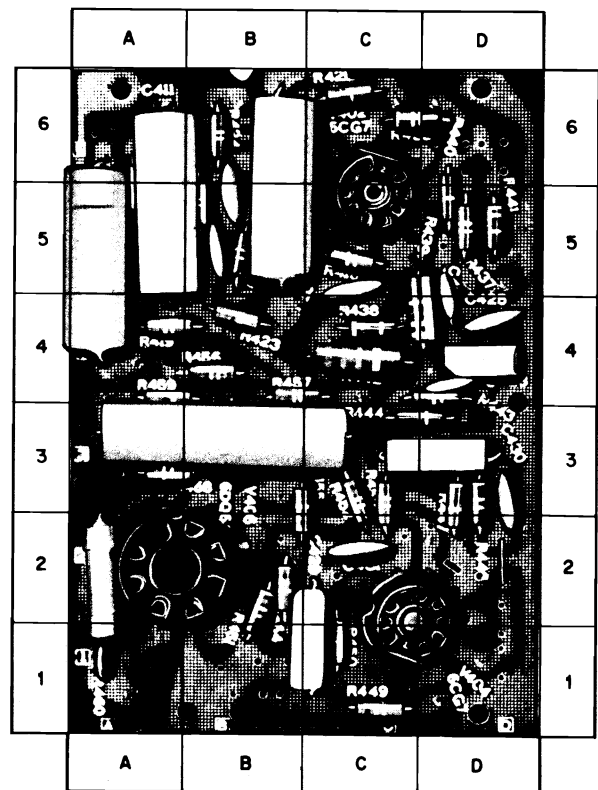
View of Component Side of Etched Circuit Board 14E257-3. Refer to Parts Location Table "A".
